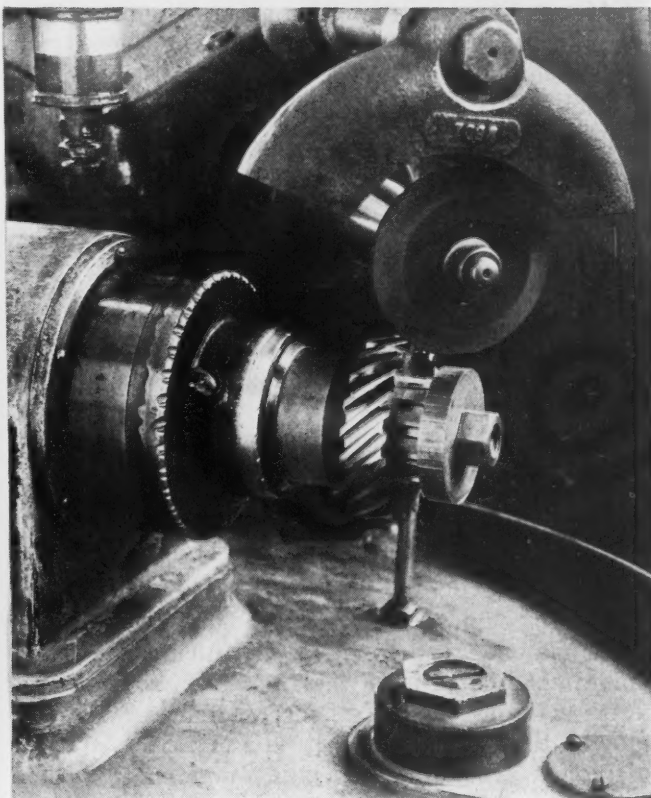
Helical Gears are Ground by Rotating the Gear while it is being Traversed Past the Grinding Wheel
